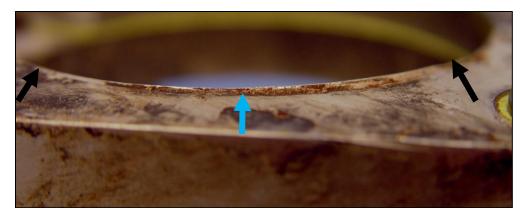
The right rear edge of the #1 bearing rear flange, looking inwards.
